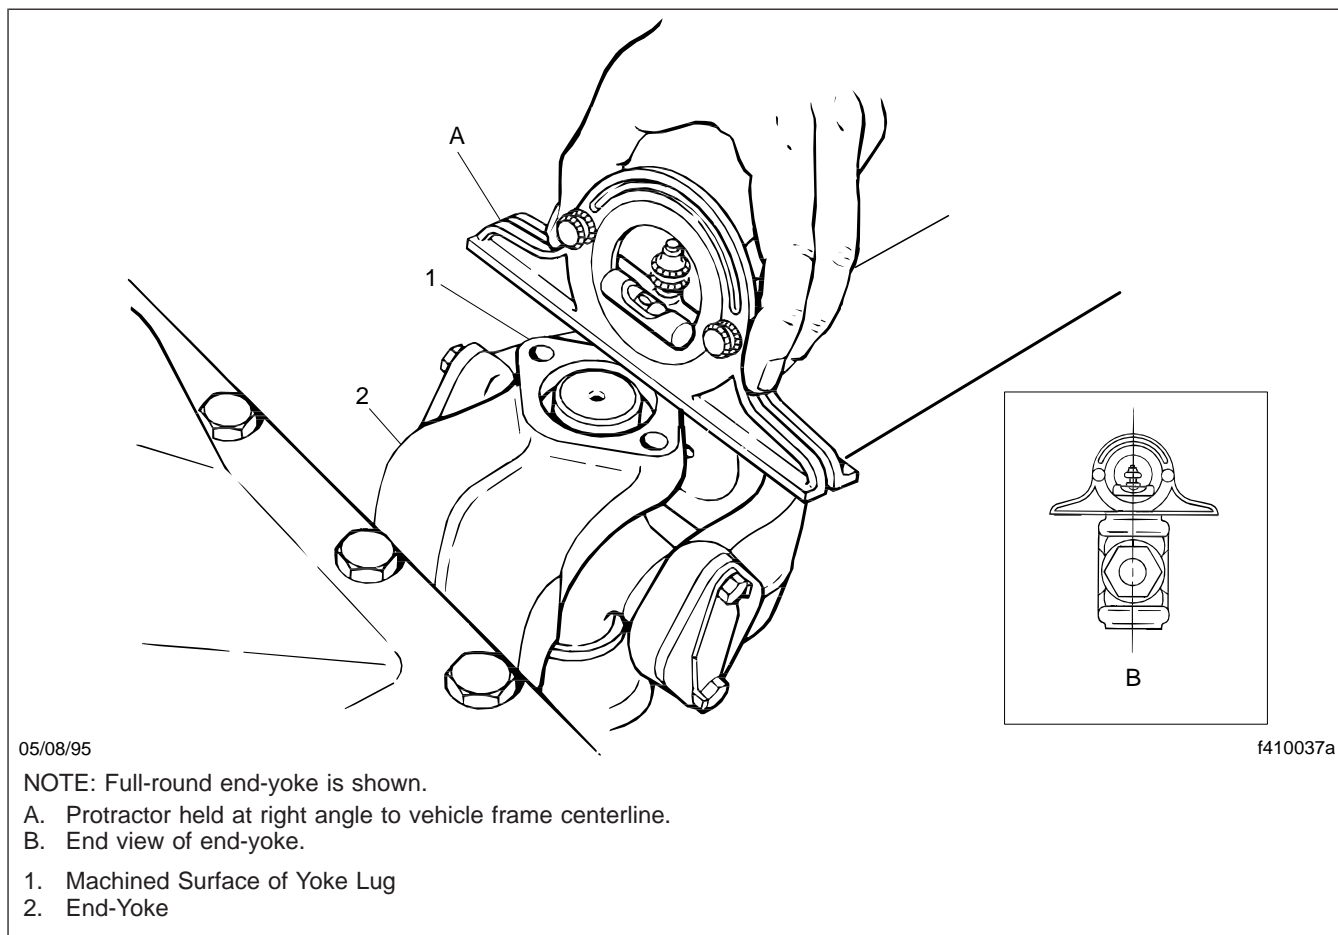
, Horizontal Positioning of Yoke Lug Machined Surface
